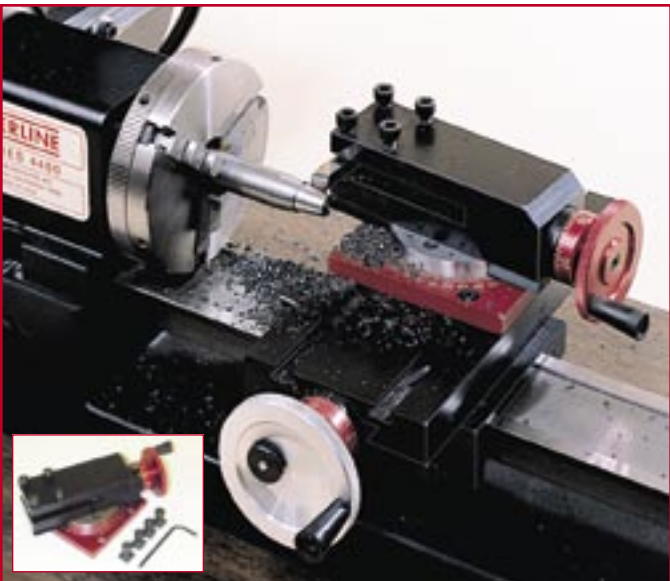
The compound slide offers another way to cut tapers. The slide is used on the "back" side of the table with the tool upside down. An inset shows the slide by itself.
